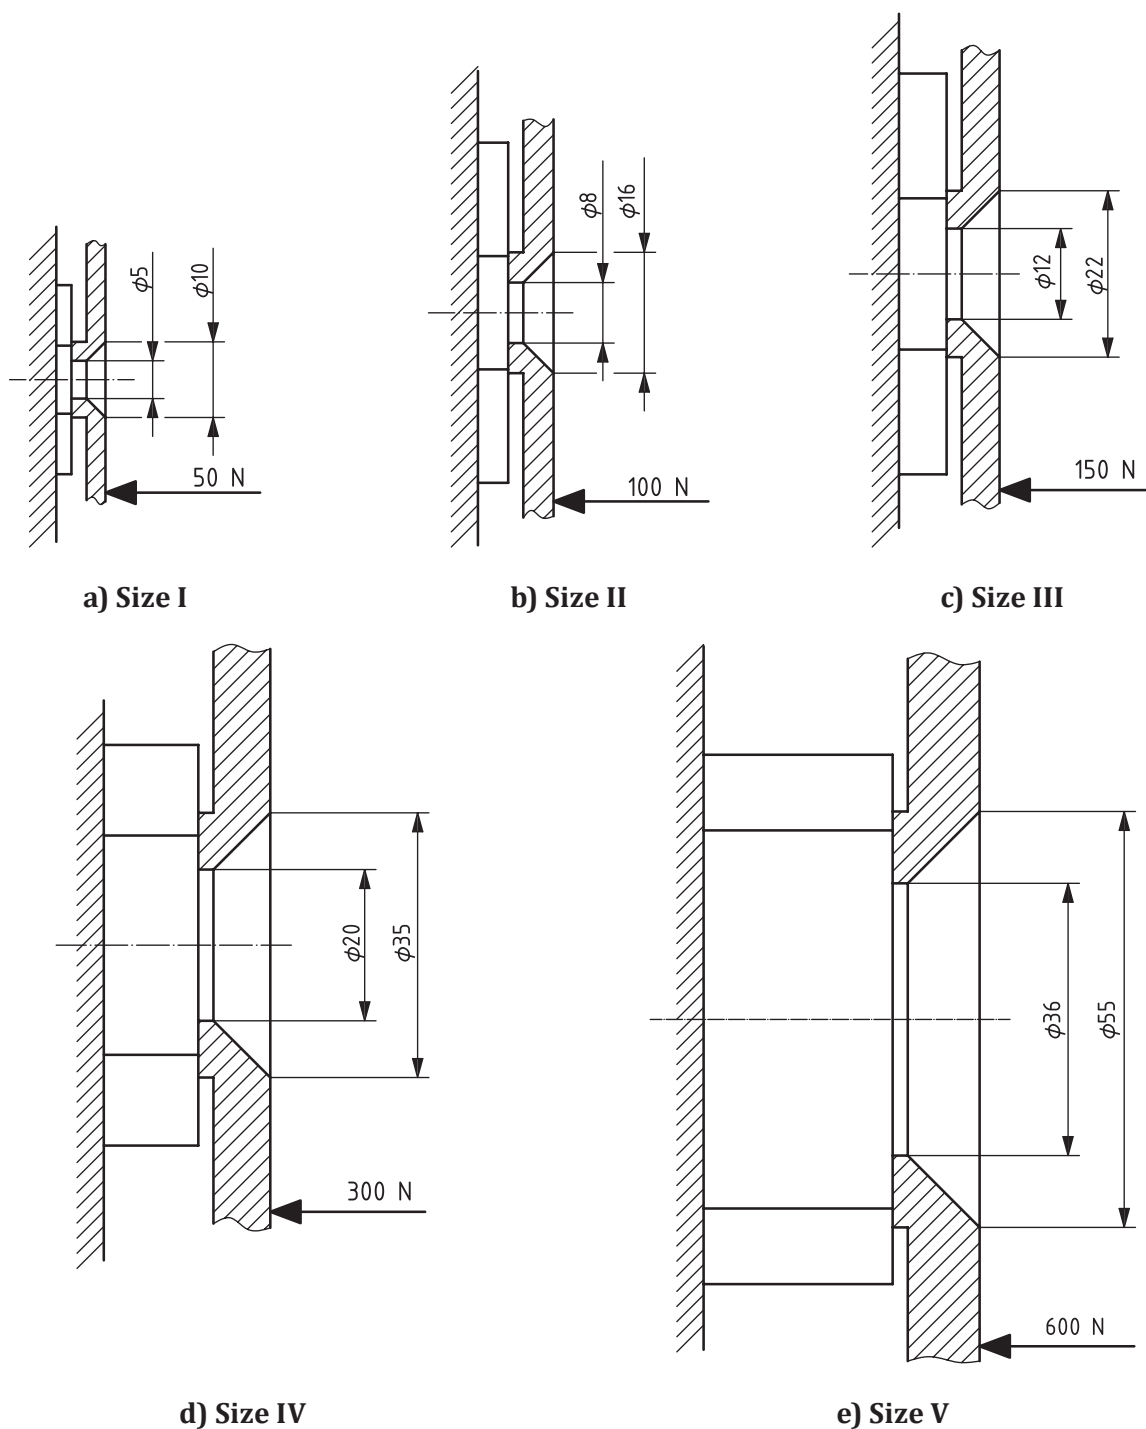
Retaining rings for test pieces of non-standard dimensions
